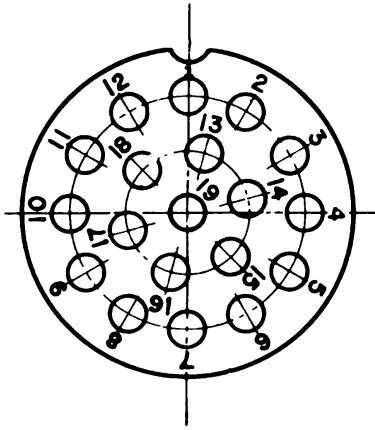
19 POLE RECEPTACLE - ASSEMBLY
